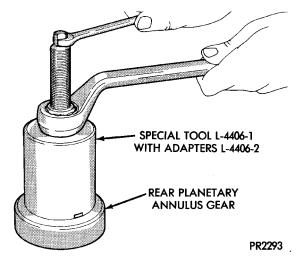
Remove Rear Planetary Annulus Gear Bearing Cone
